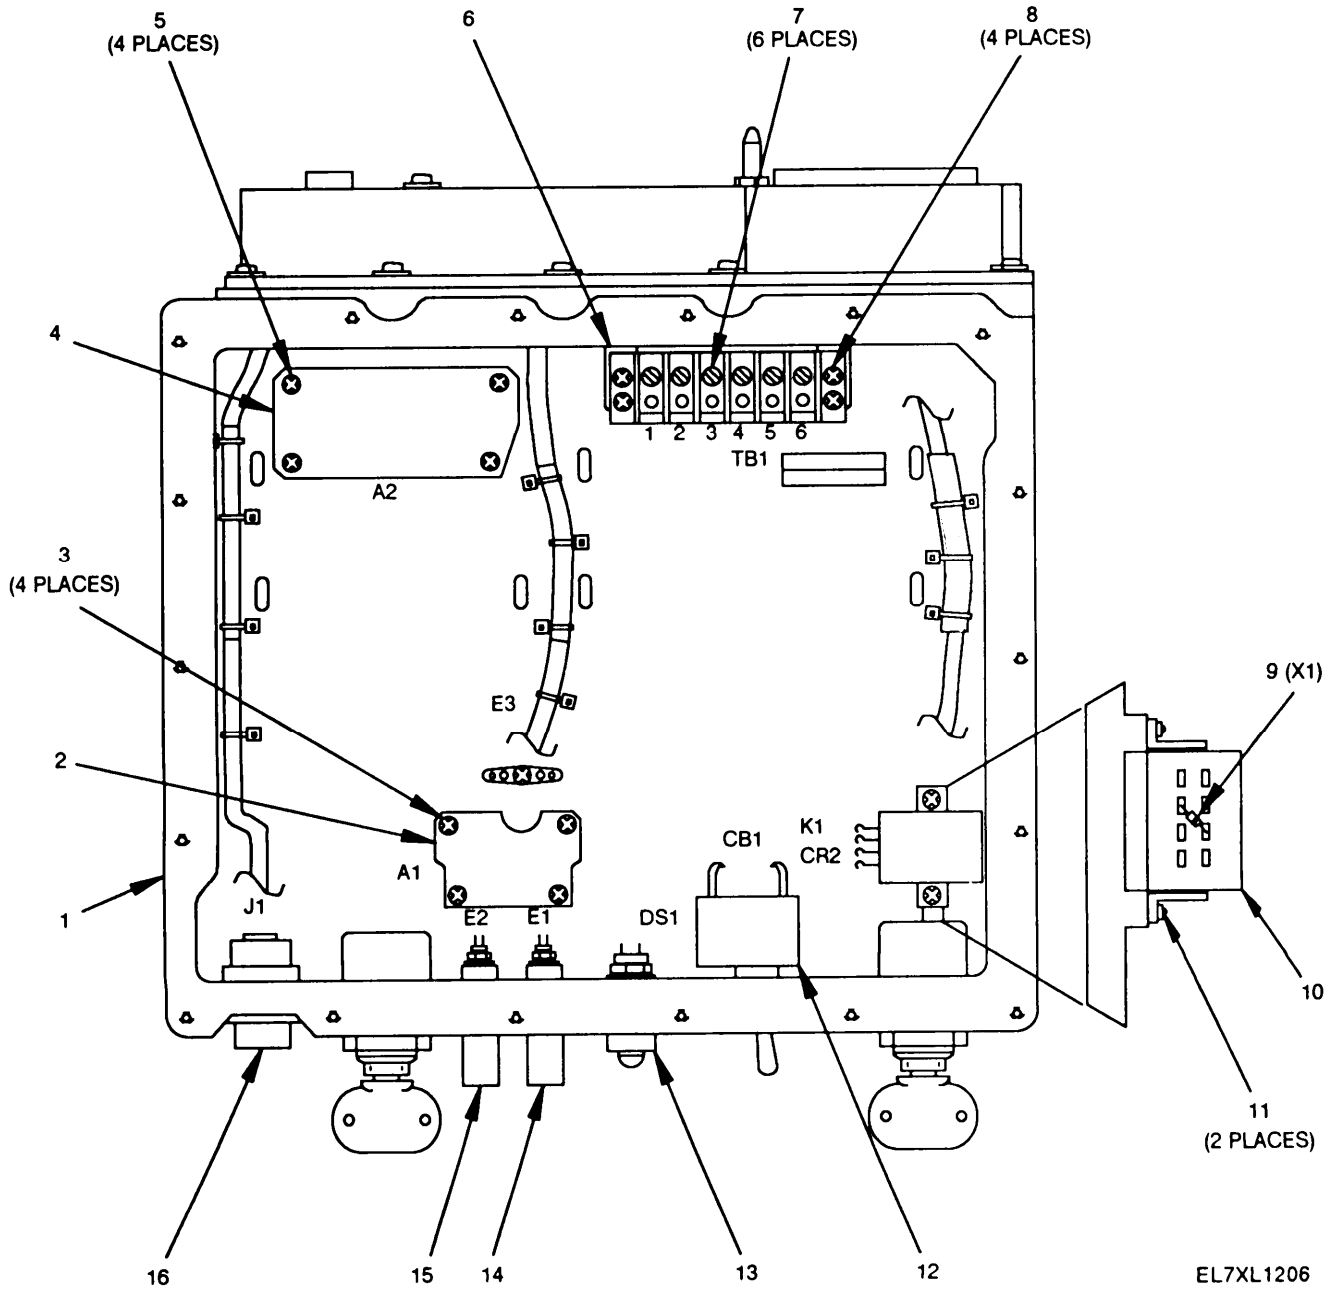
Power Supply Adapter (Bottom View) Without Heat Sink Assembly.
